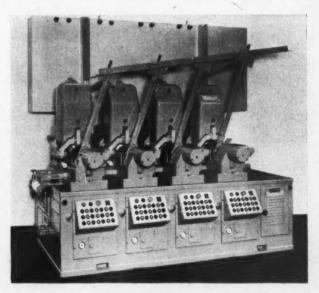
Thielenhaus 4-spindle machine for superfinishing raceways for anti-friction bearings
